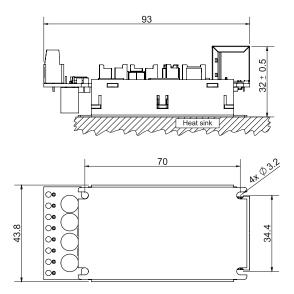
iPOS481x XZ-CAT drive dimensions
